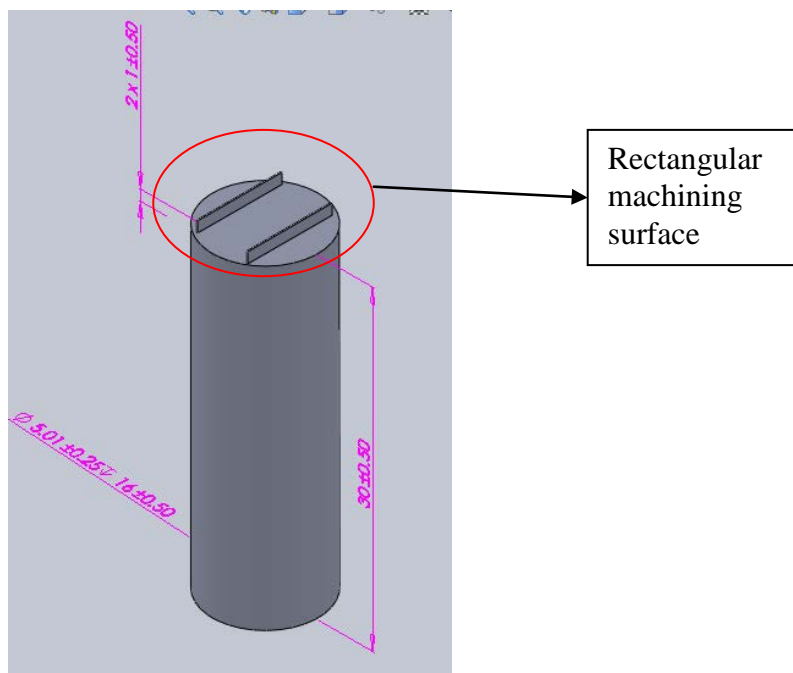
Tool design 1 with rectangular extruded machining surface
